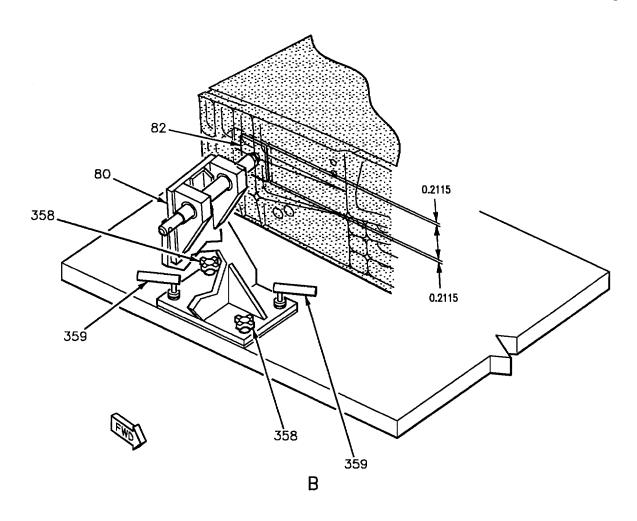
Inner Wing Attach Lugs (Sheet 1)
